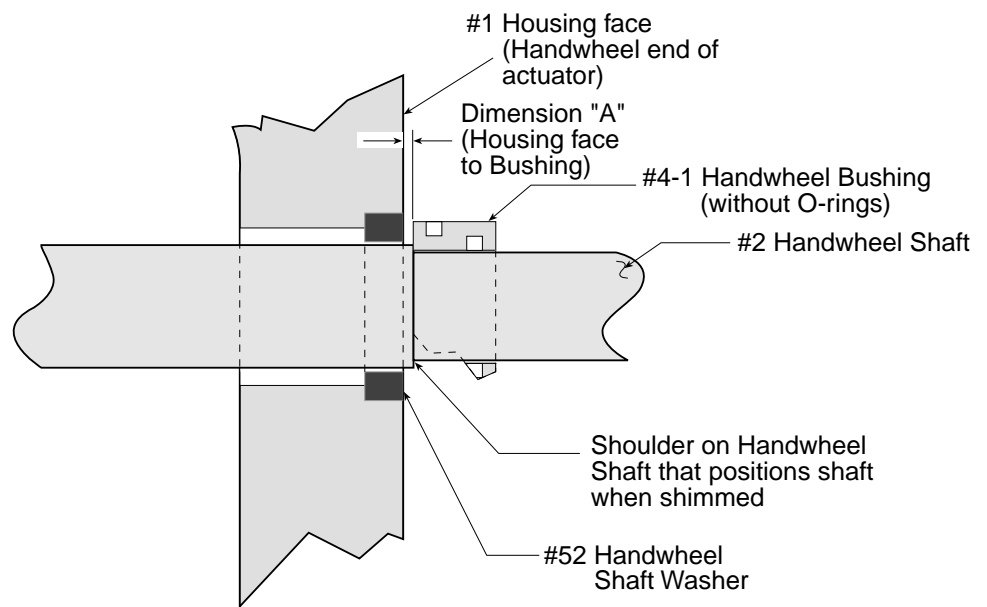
Gap between Housing face and Handwheel Bushing shown as dimension "A"
